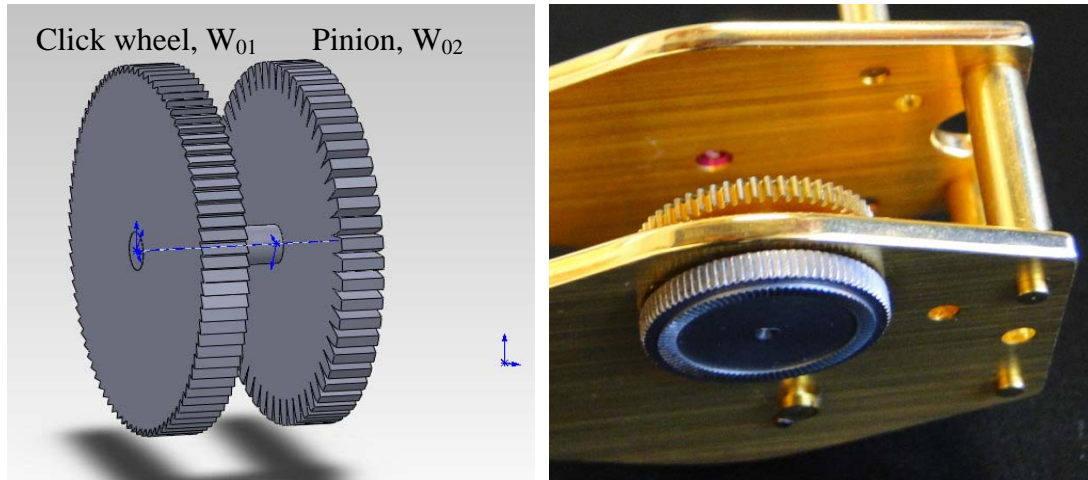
Click wheel, W_{01} , and great wheel pinion, W_{02} - (a) SolidWorks image, (b) actual components mounted on plate
